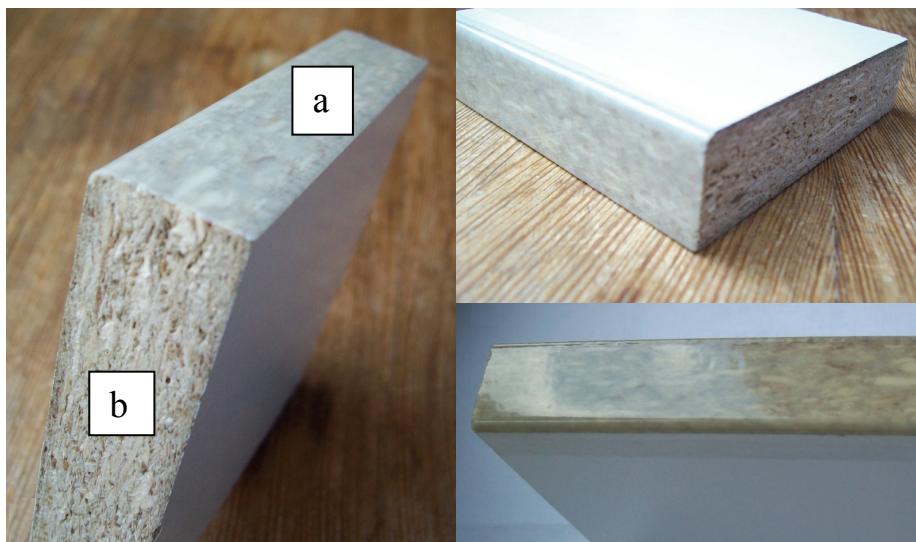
Particle board with one edge lacquered with colourless lacquer.
